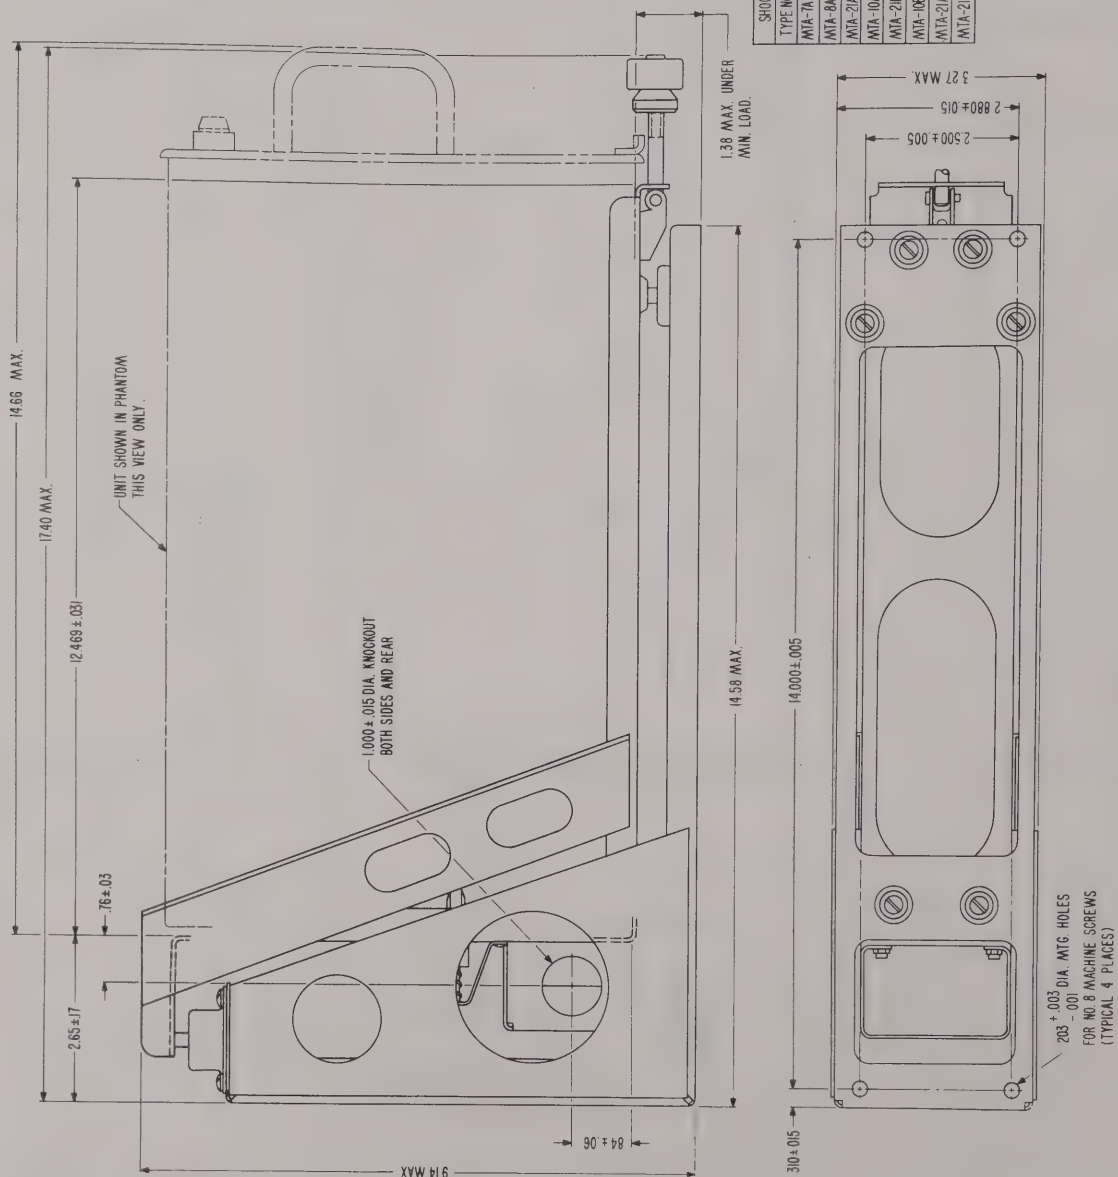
MTA-21A/-21E Shockmount (For Receiver/Navigation Unit), Outline Drawing
